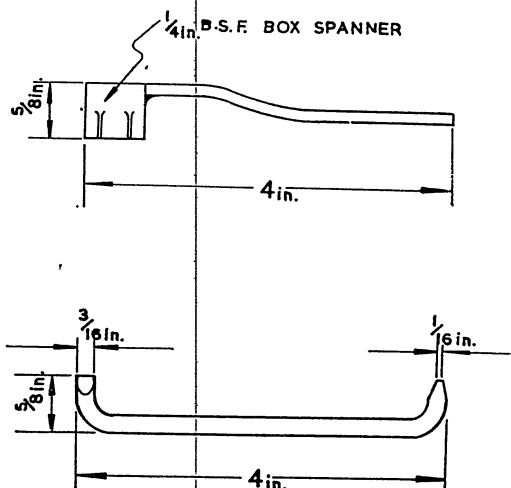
Suggested box spanner and right-angled screwdriver for adjusting the oil pressure relief valve
